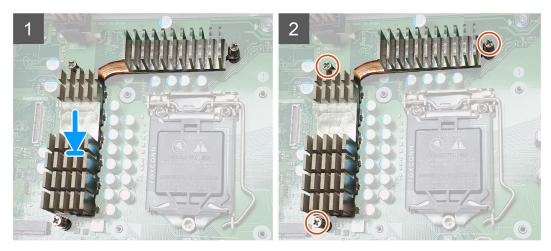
VR heatsink assembly for systems shipped with 125 W CPU
